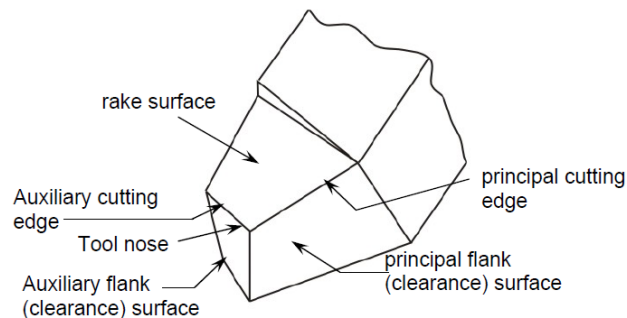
Basic features of single point tool (turning) in Tool-in-hand system.
